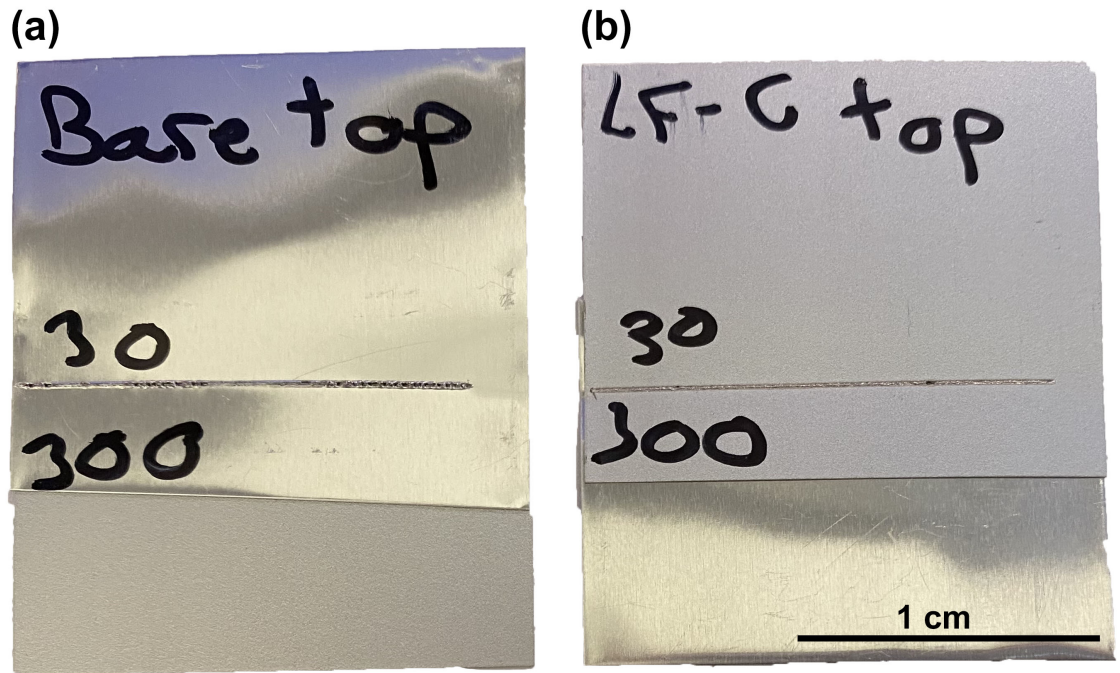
Both (a) and (b) were welded using a laser power of 668 W and a laser speed of 300 mm/s. In, (a) a bare tab is welded to an anodized tab, while in (b) an anodized tab on top is welded to a bare tab.
